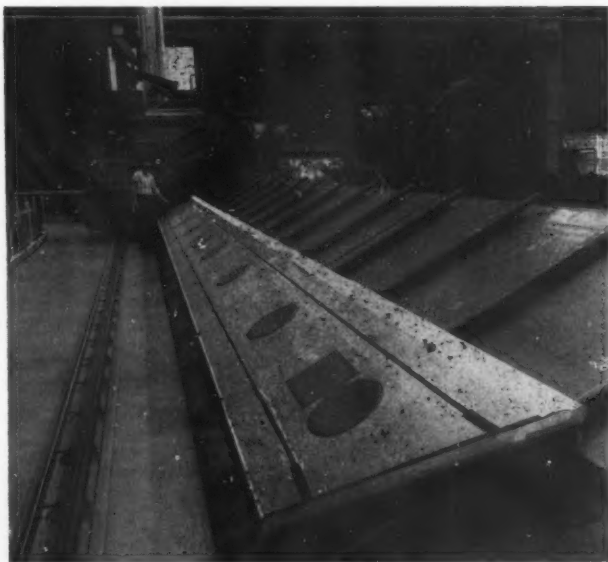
Peenamatic Travelling Carriage Shot Peening Machine for Forming Integrally-stiffened Wing Panels
